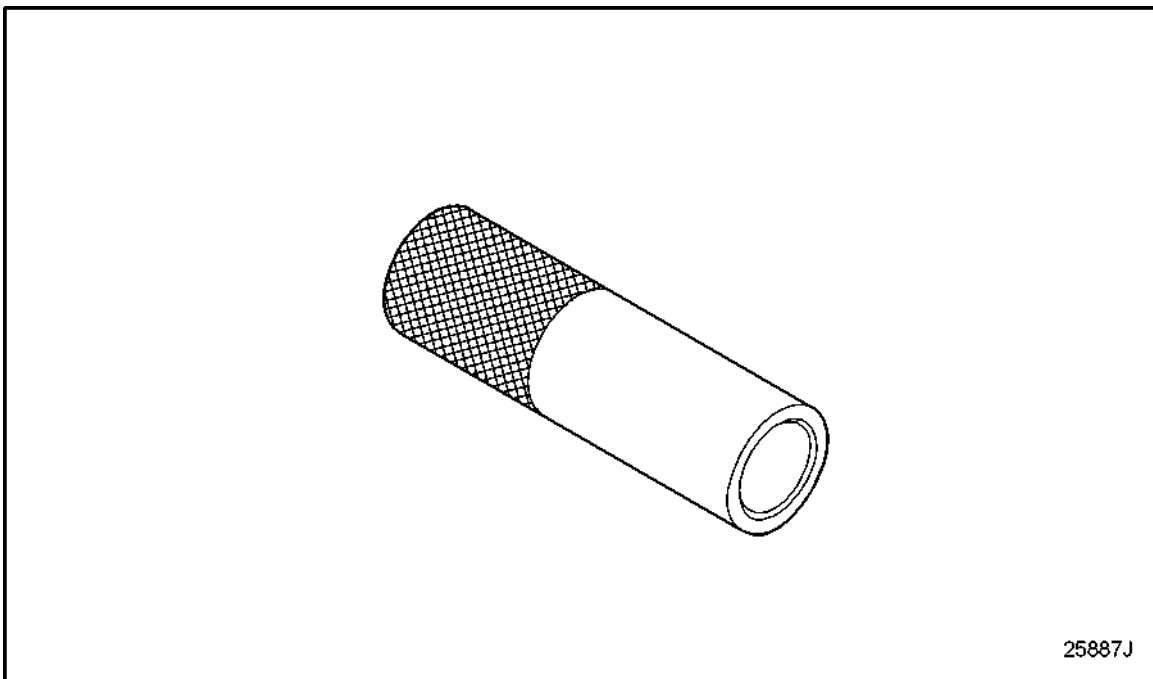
Valve Guide Installer (Large Stem),J 22082-01
